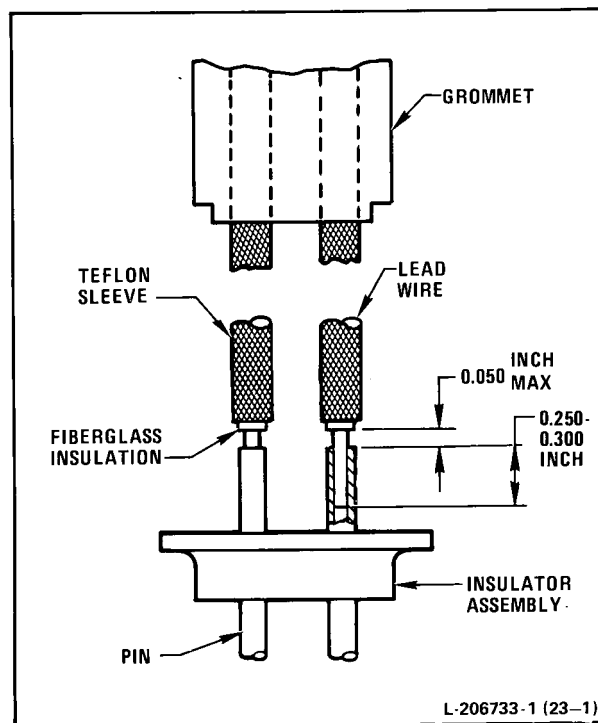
Installation of Lead Wires Into Insulator Assembly (Sheet 3 of 6)
